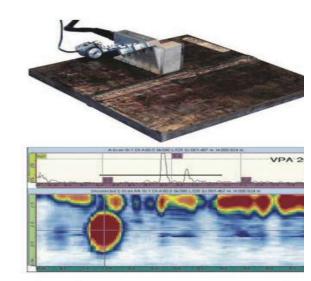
One-line scan for weld inspection using an encoded 2.2 element probe steered at 60 degrees
